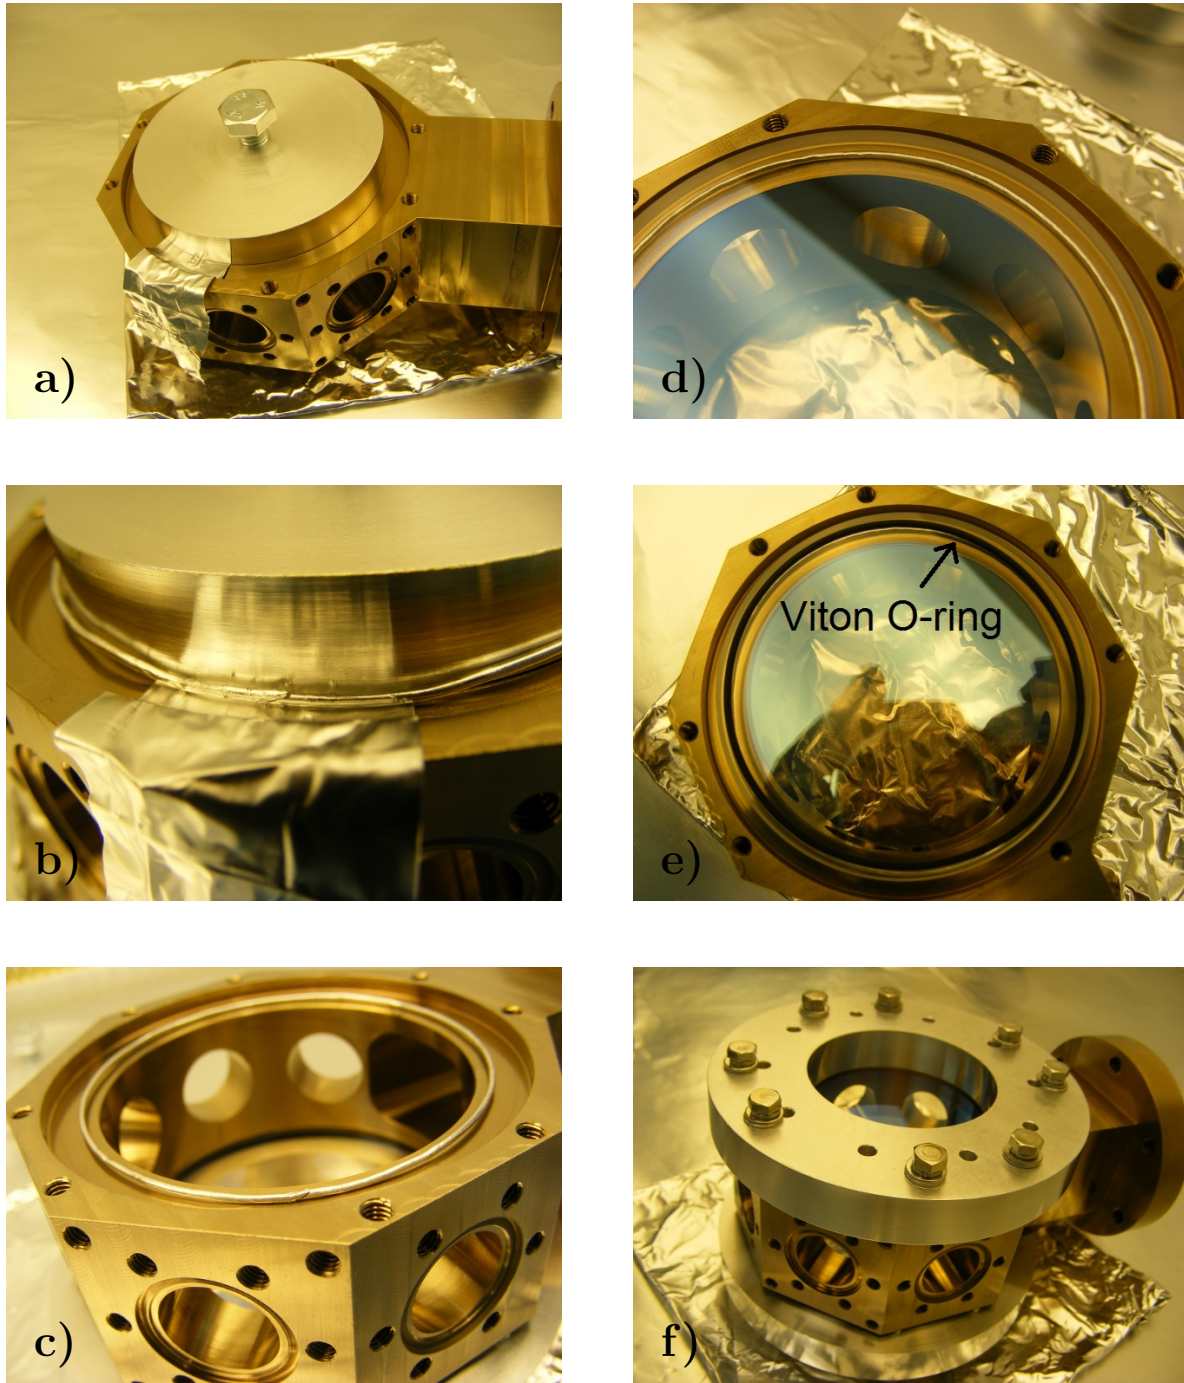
Stages for the production of an indium seal.* a) A jig is used to shape the indium wire in a ring of 67mm diameter. It rests on the chamber rim with a piece of aluminium foil underneath to protect the chamber from scratches when the indium wire is cut. b) Indium is placed around the jig making a ring. Overlapping ends are cut at an angle and joined together. c) Aluminium foil and jig are carefully removed, leaving the indium ring centred. d) The window is centred on the chamber and placed cautiously on top of the indium ring. e) A viton O-ring is laid on top of the window coinciding in position with the indium ring. f) The compression flange is mounted and fixed with eight M4 screws.
